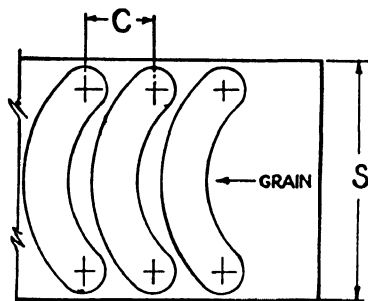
Arc-shaped blanks cut from a single row and using short blanking centers.
